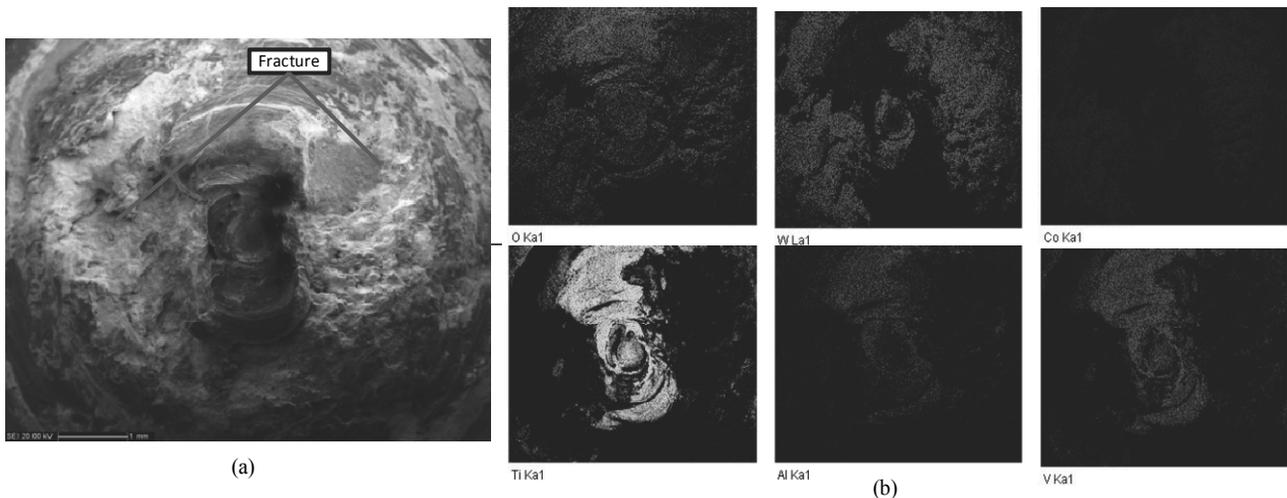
(a) Micrograph of tool pin showing a fractured region, (b) EDX maps of tool pin showing the components found
